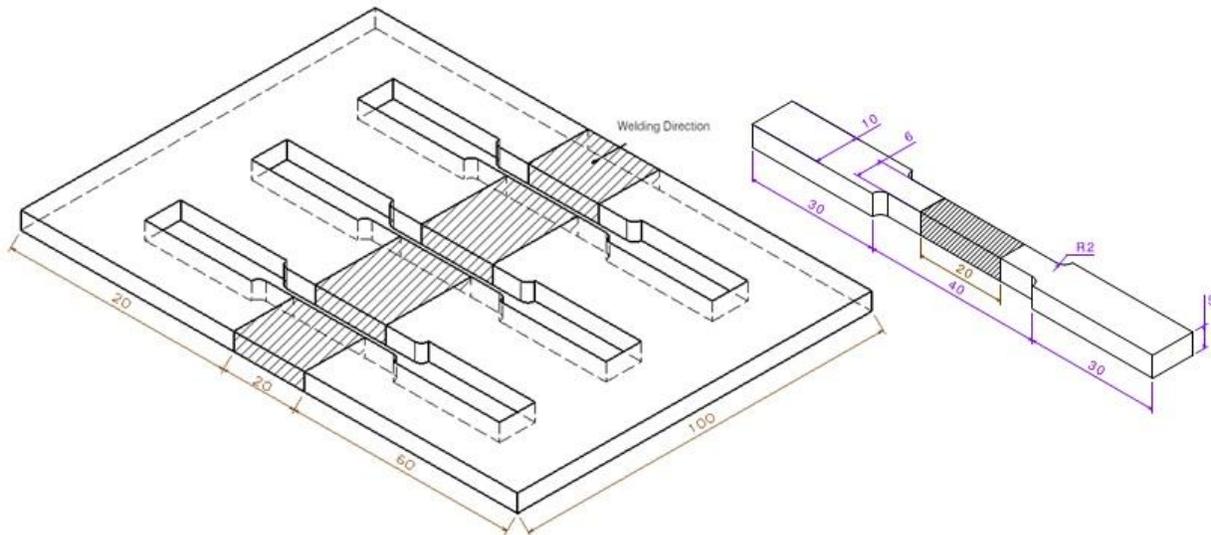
Schematic view of tensile test specimens prepared from welded plates
